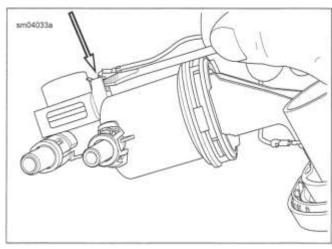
Remove Ground Wire Spade Terminal From Fuel Filter Shell
